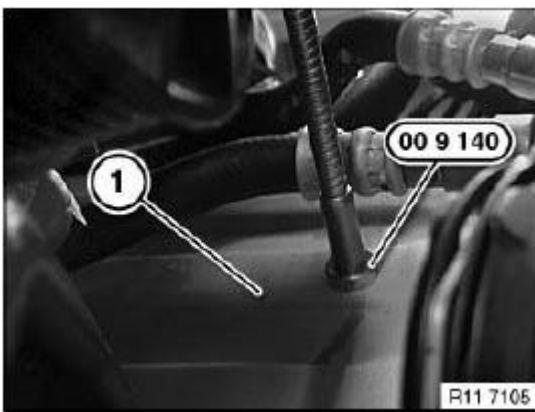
Securing Special Tool 00 9 140 With Magnet To Engine Carrier
